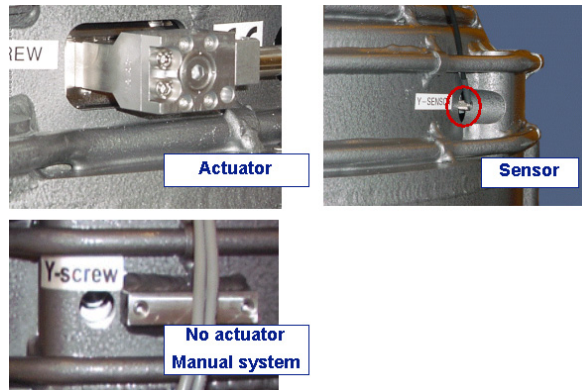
XY manipulator parts that are visible on the lens outside.
